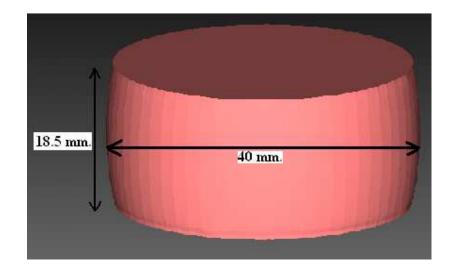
Billet Dimension after Upsetting Operation for Perpendicular Position
